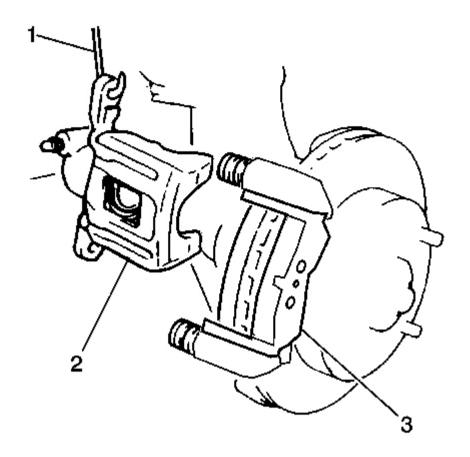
Identifying Front Brake Caliper Courtesy of GENERAL MOTORS CORP.
